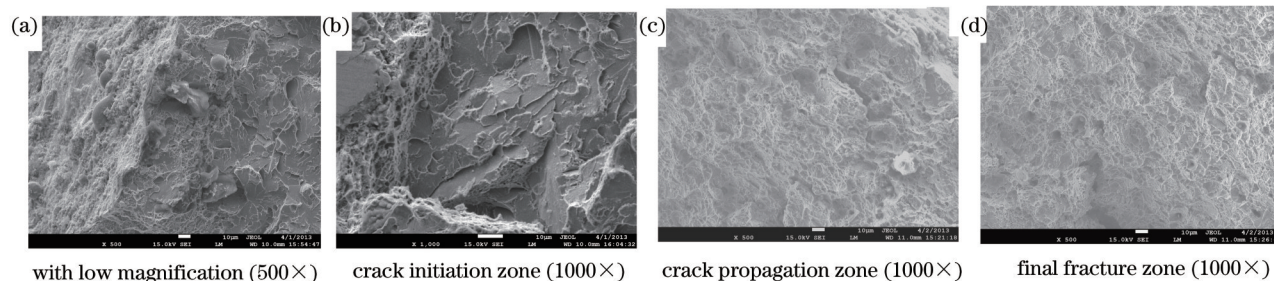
Micro-morphology of impact fracture of laser hardened samples
